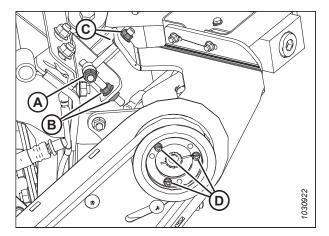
Drive Pulley – Conditioner Drive Motor
